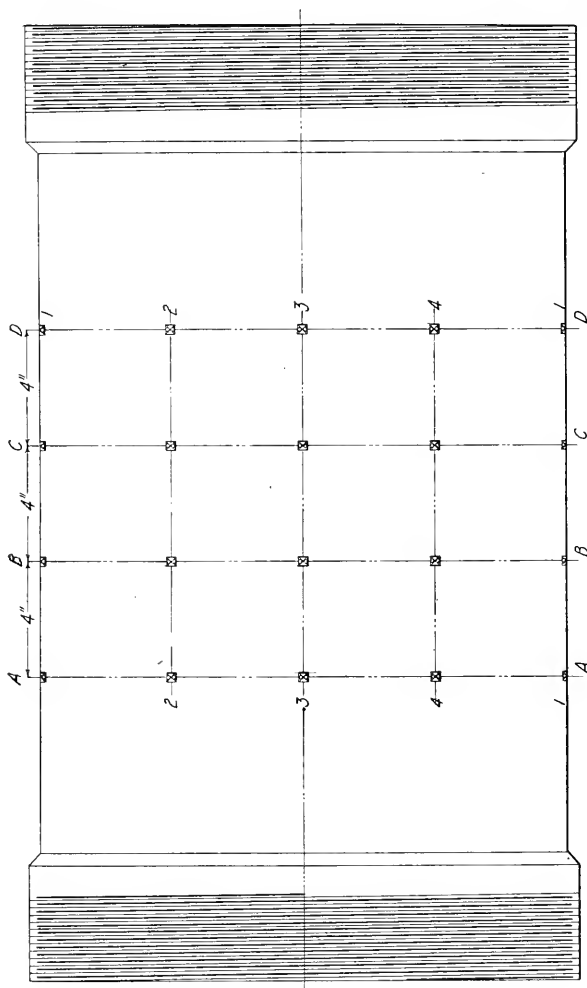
LOCATION OF GAGE LINES ON DEVELOPED OUTER SURFACE OF A TUBE.
